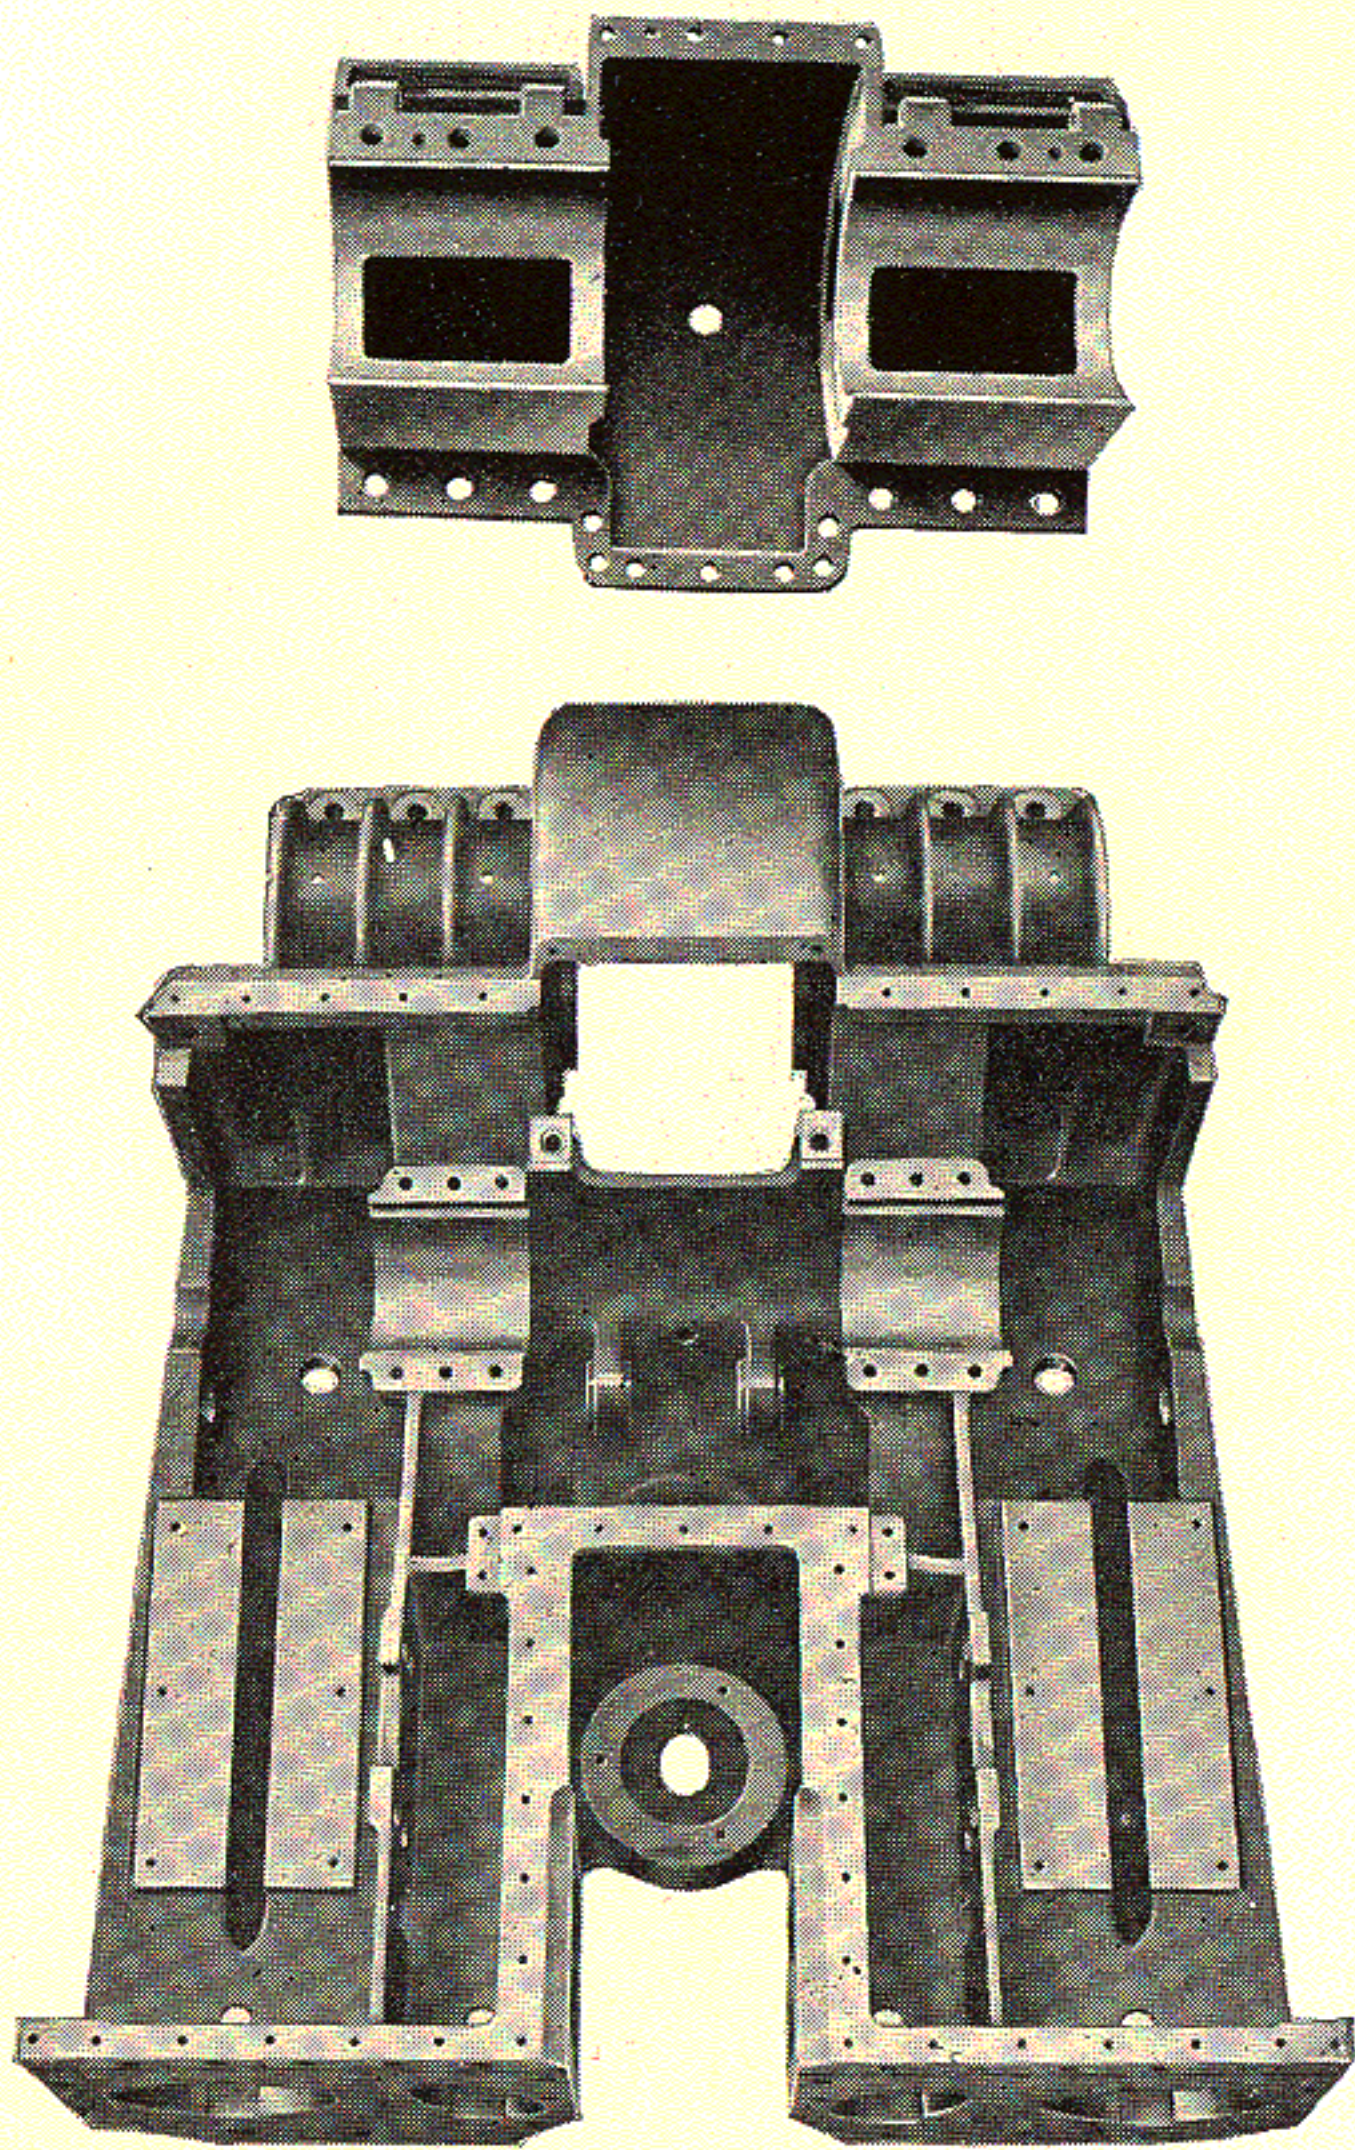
Type C-2 Booster Engine Bed and Axle Bearing Cap
